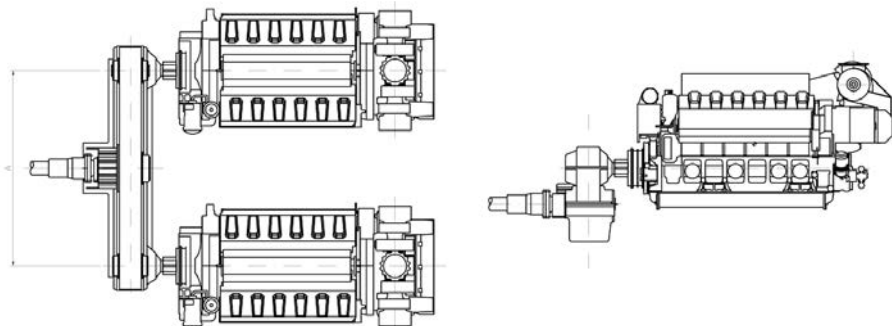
Crankshaft centre distances, V-engines (DAAE034187B)
